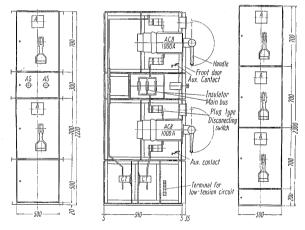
Outer dimensions of enclosed box (3P 1000 A air circuit breaker)
